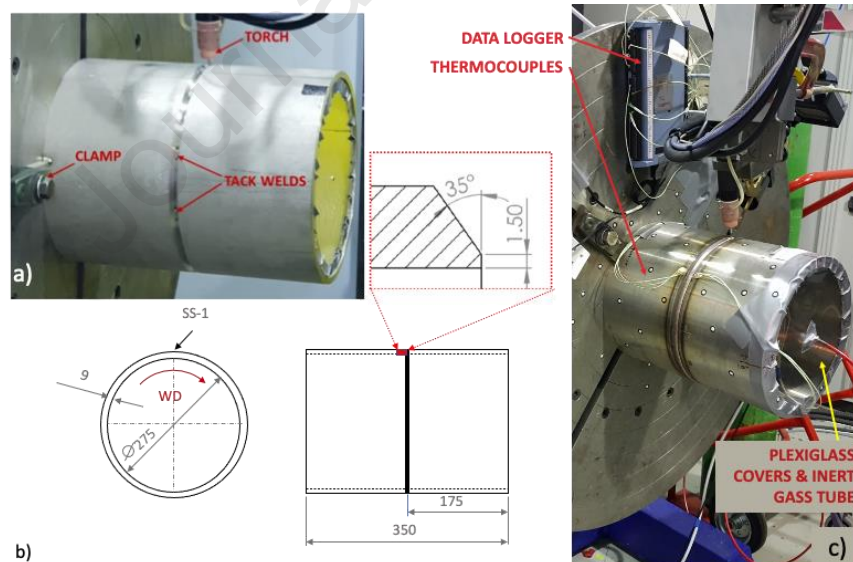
(a) General arrangement of mock-ups showing the clamping arrangements and tack weld, (SS-1: Pass-1 start position), (b) Drawing of the specimen and groove dimensions indicating the location of Pass-1 start position (SS1), (c) Welding set-up and instrumentation.
